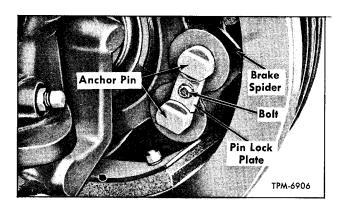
Front Brake Shoe Anchor Pins Installed (Typical)
